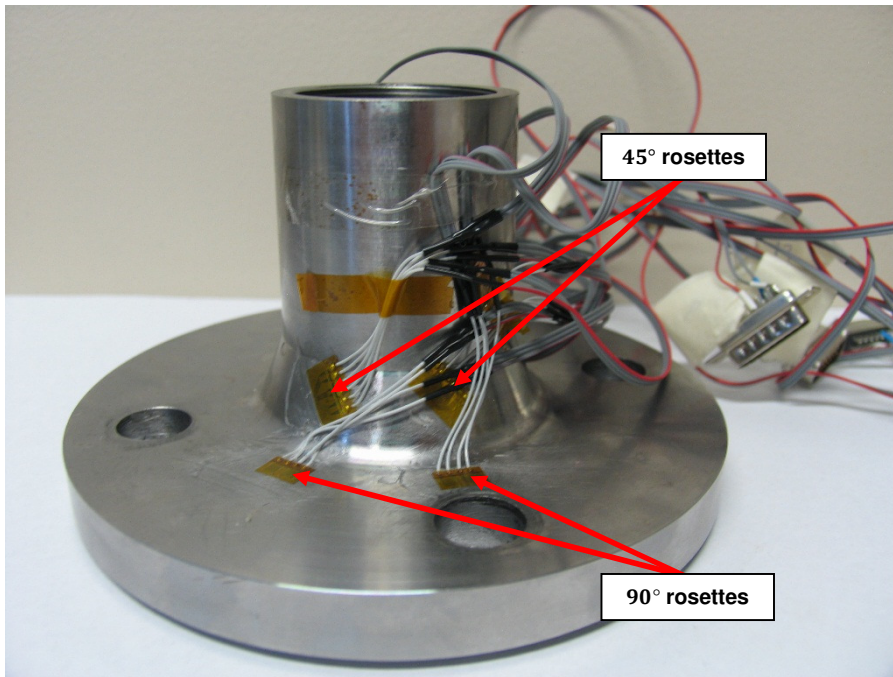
Photograph of the instrumented raised face flange with an O-ring groove
